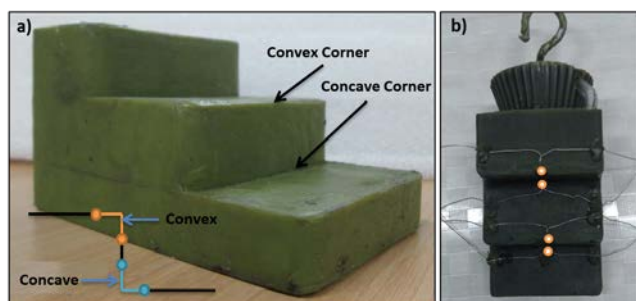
(a) Step shaped wax pattern indicating the convex and concave corner (b) Thermocouple placement at corners
